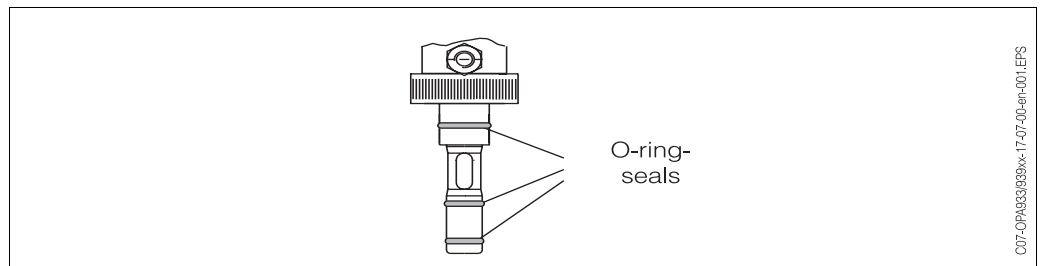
O-ring seals of the CleanStar OPA 933/939 (in contact with medium)
